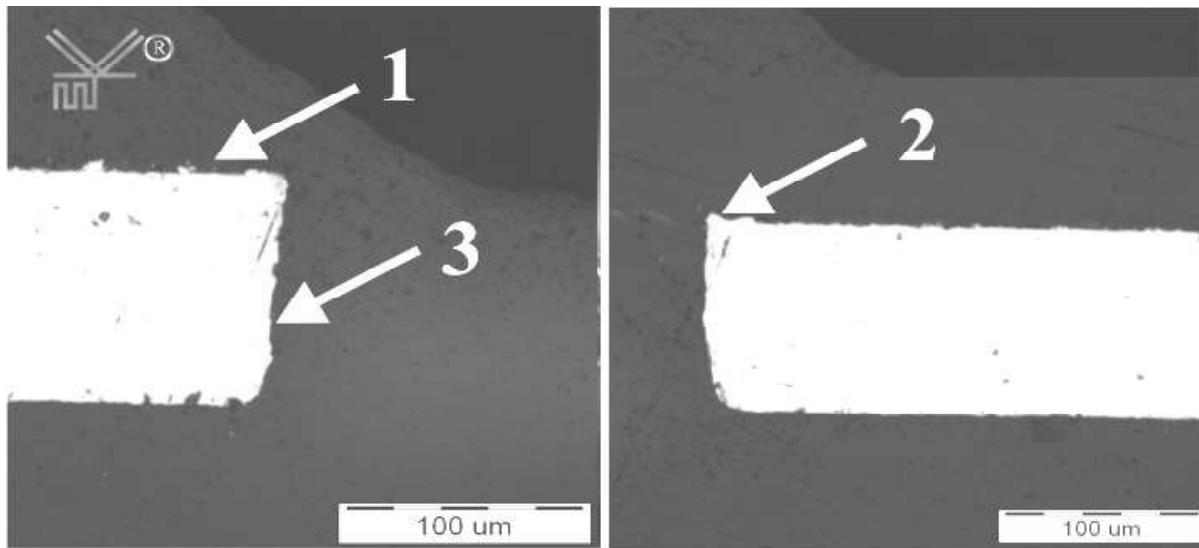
Cutting a laser cut stencil. 1- plane of the mask, 2 – edge of the hole, 3 – wall of the hole
